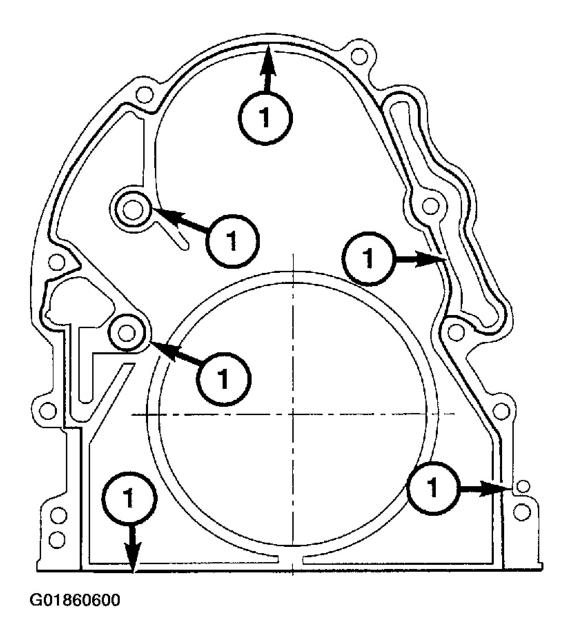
Applying Sealant Courtesy of DAIMLERCHRYSLER CORP.
